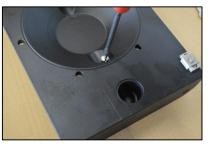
Unscrew the housing screws [37] on one side of the pump and take off the housing [11]. Remove the loose manifolds [13].
